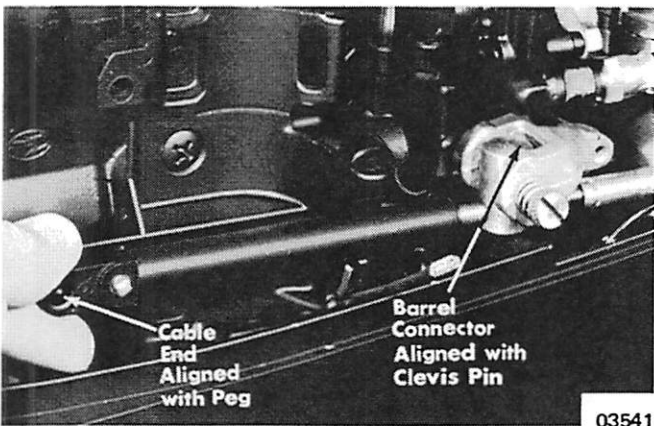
Adjusting Barrel Connector on Shift Cable - 1968-thru-73
